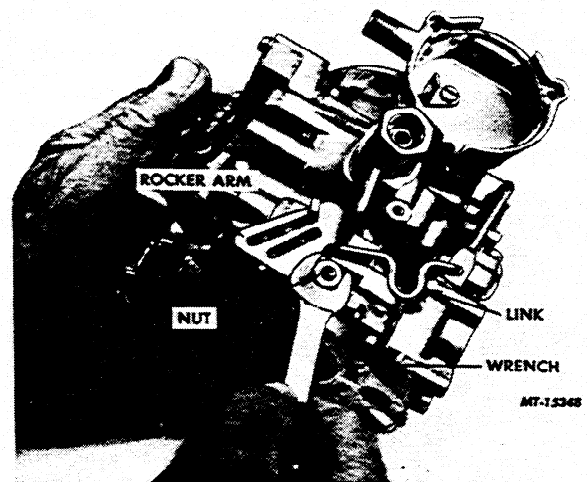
Remove or Install Accelerator Pump Rocker Arm
